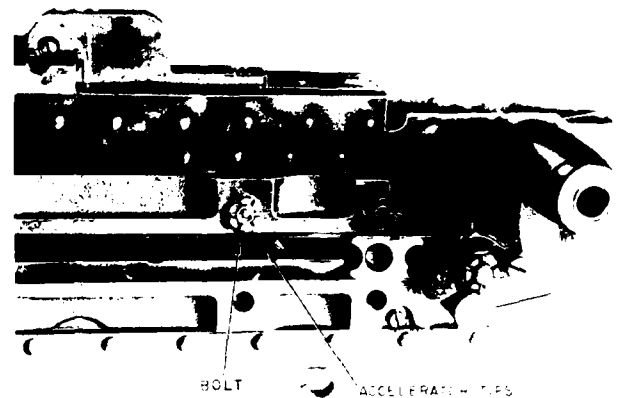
illustrates how the bolt group is replaced into the receiver. The top of the cocking lever must be forward and the extractor must be down (flat), as shown in view A.
